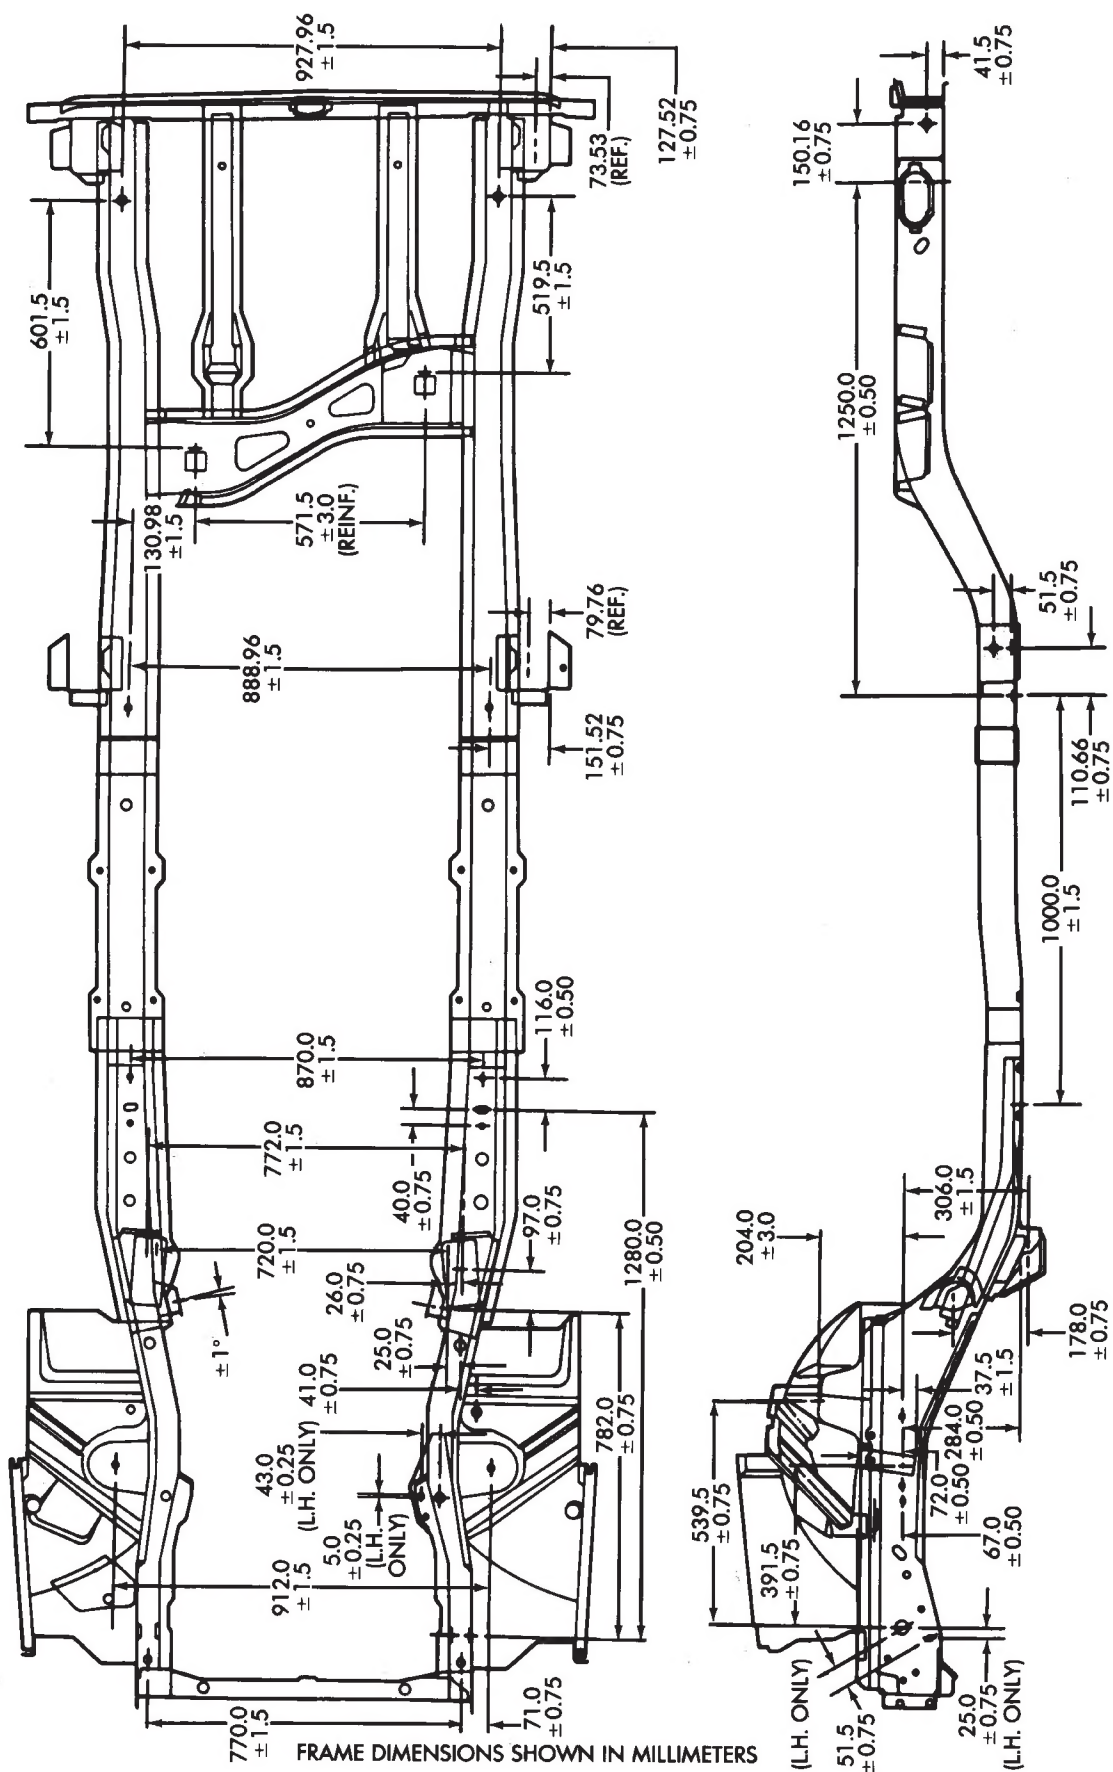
Frame Alignment Reference Dimensions—XJ Vehicles
